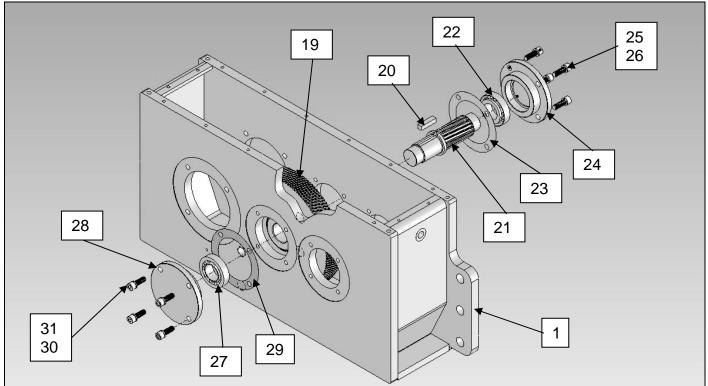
, Gearbox Assembly, (Drum Pinion & Shaft)
